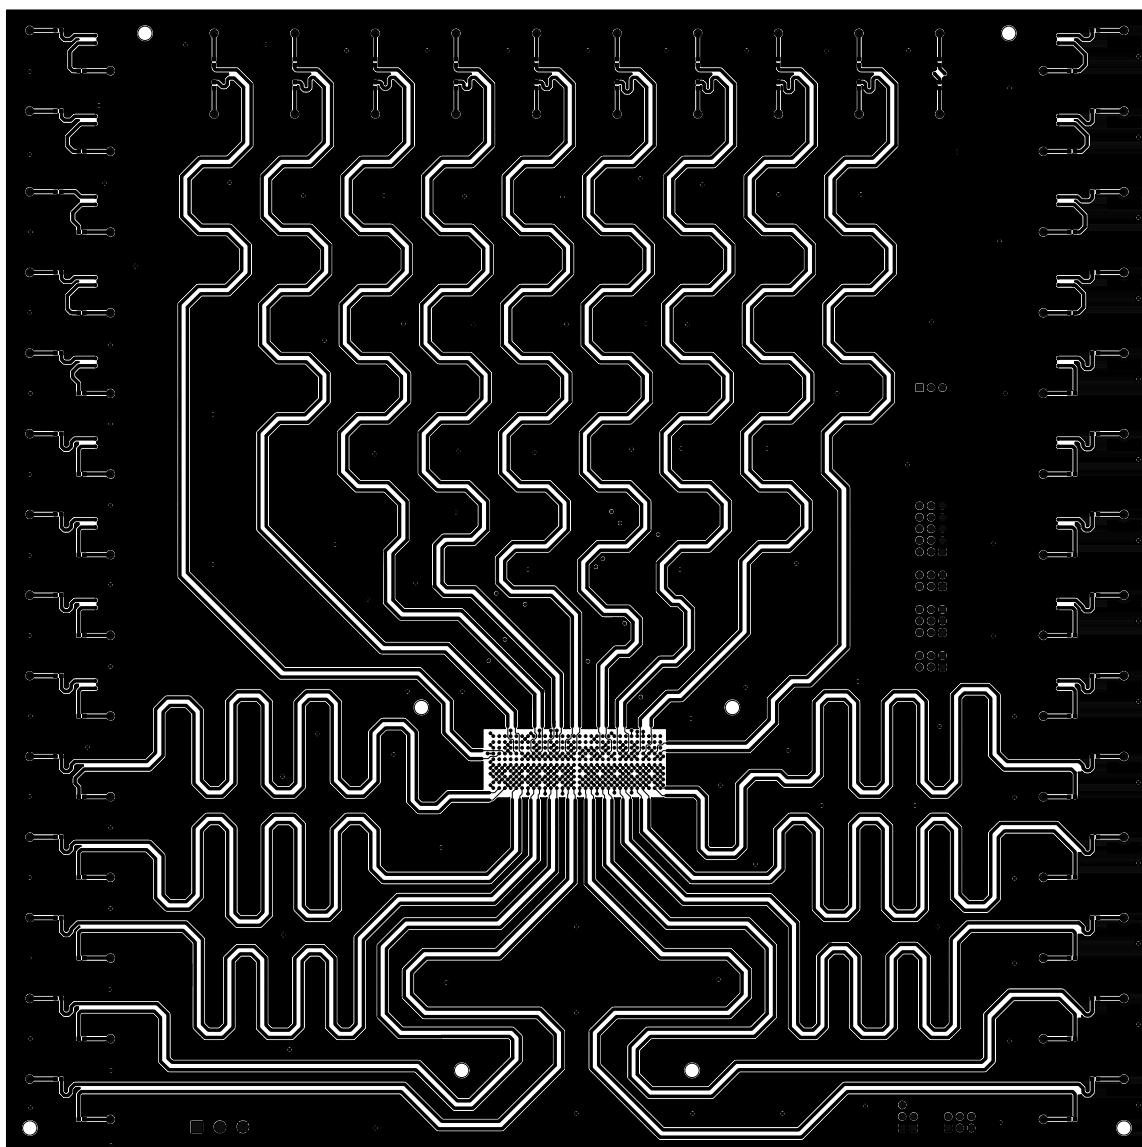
Layer 1—Component Side (Optional Full-Duplex Motherboard)
